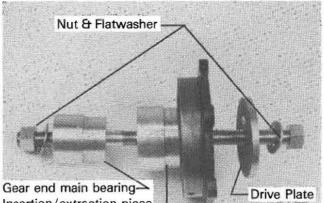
Insertion and Extraction Tool Assembled in Block for Gear end Main Bearing Removal
